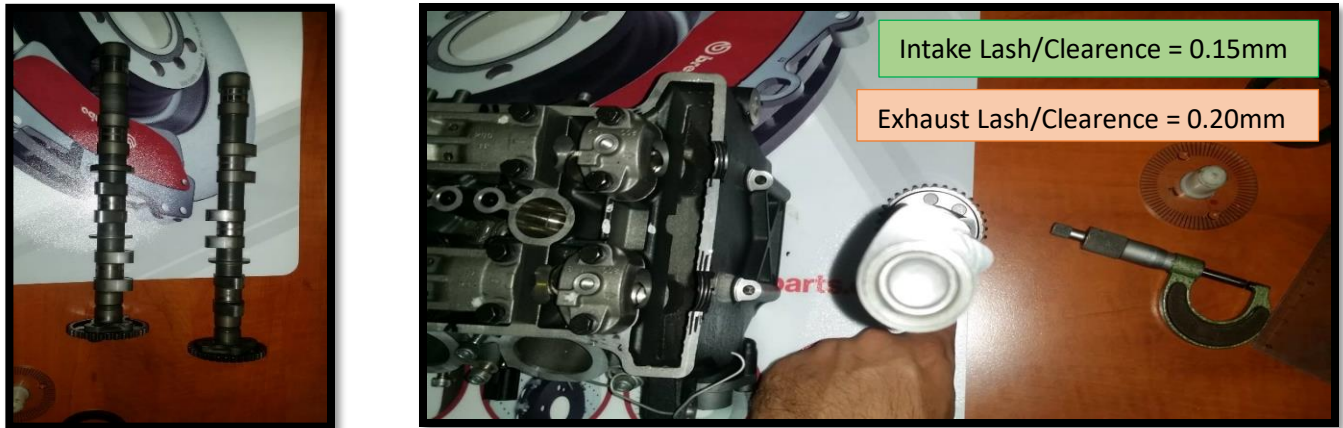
Intake and Exhaust Camshafts of Yamaha R6 Cylinder Head
